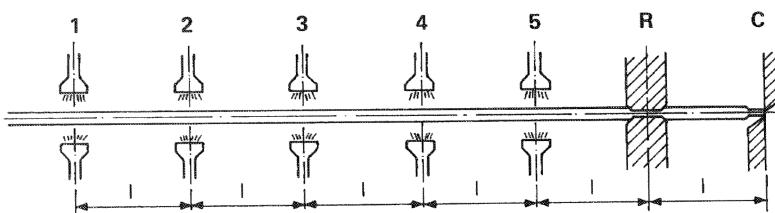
Design arrangement of heaters for a hot flattening installation
